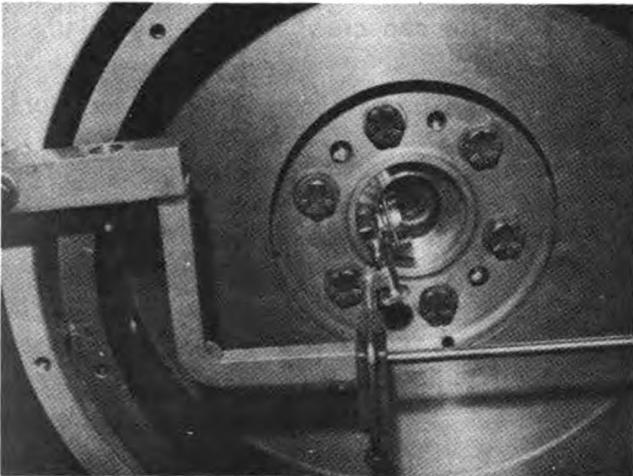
(N114138). Check The Location Of The Bearing Bore.
